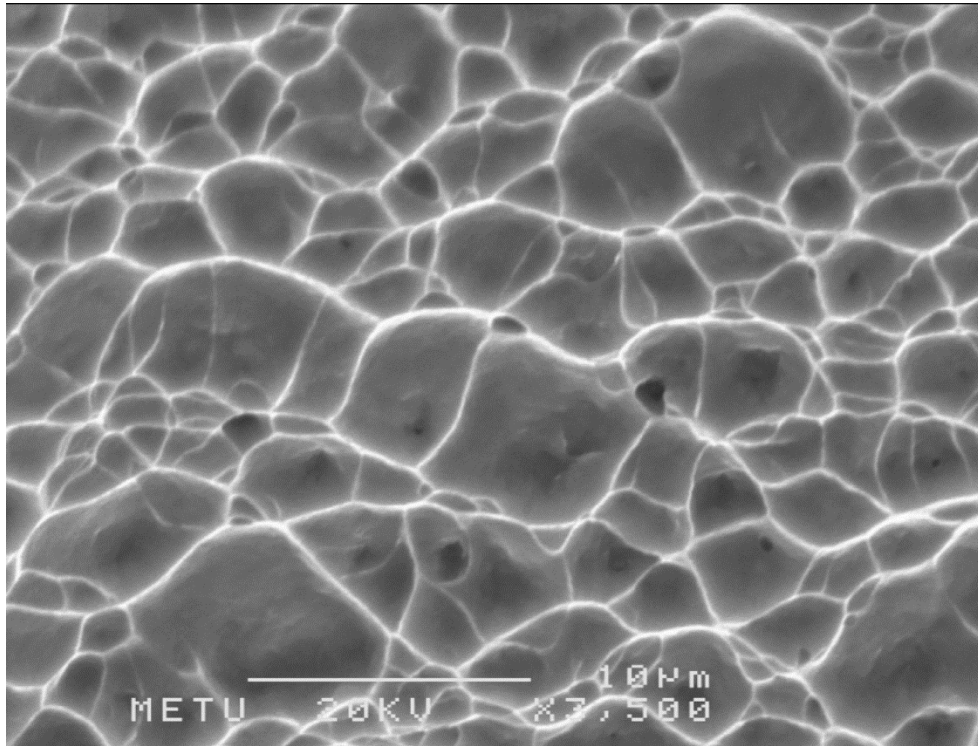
The dimple structures on the fracture surface of EBm-Ti6Al4V fabricated at 30⁰angle.
